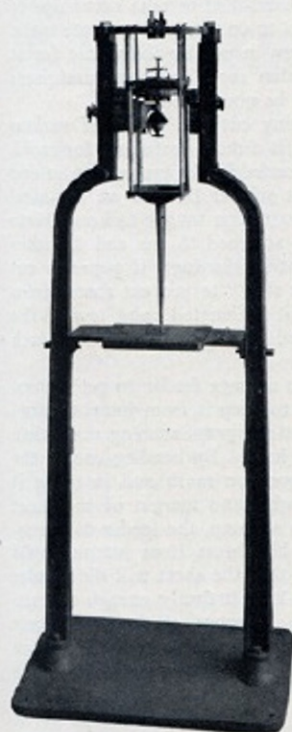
The Benton punch-cutting machine, on which the first steel punch was cut for the Mergenthaler linotype machine. The second machine built by Benton. The Mergenthaler Printing Company bought No. 3 in 1889 and several others shortly after. Without this invention Mergenthaler's invention was impracticable. This machine is in the Typographic Library and Museum of the American Type Founders Company, in Jersey City.
